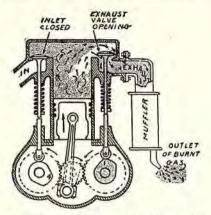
Exhaust stroke—up. The exhaust-valve cam is now raising the exhaust valve which is open, thus permitting the burned gas to be forced out of the exhaust pipe through the muffler.
